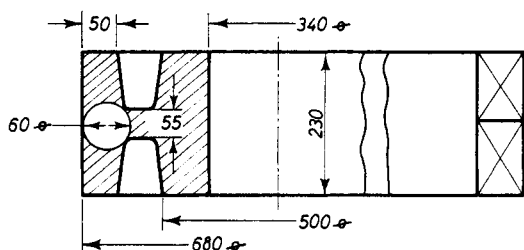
Wheel casting. Rim cooled by chills and fed by the hub feeder head (on one side) through the wheel disc. Sand fillet effects were inhibited by the severe chilling.
